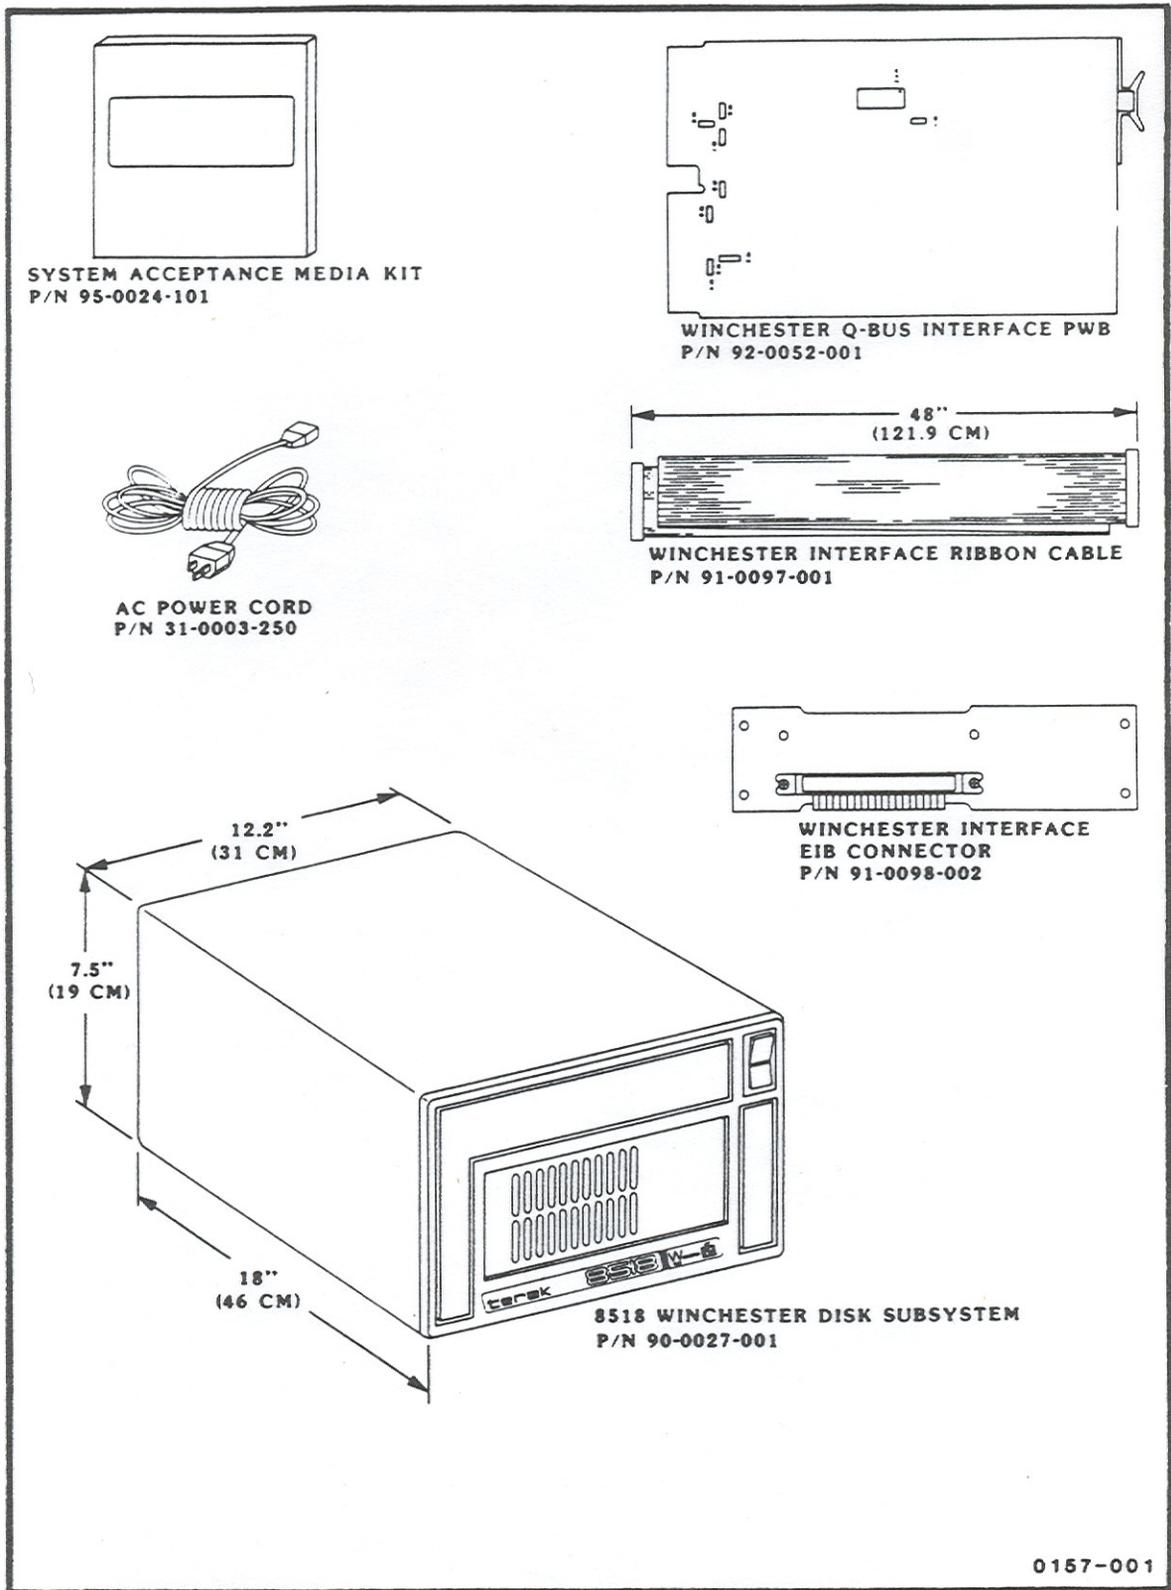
COMPONENTS - 851B WINCHESTER DISK DRIVE ASSEMBLY
